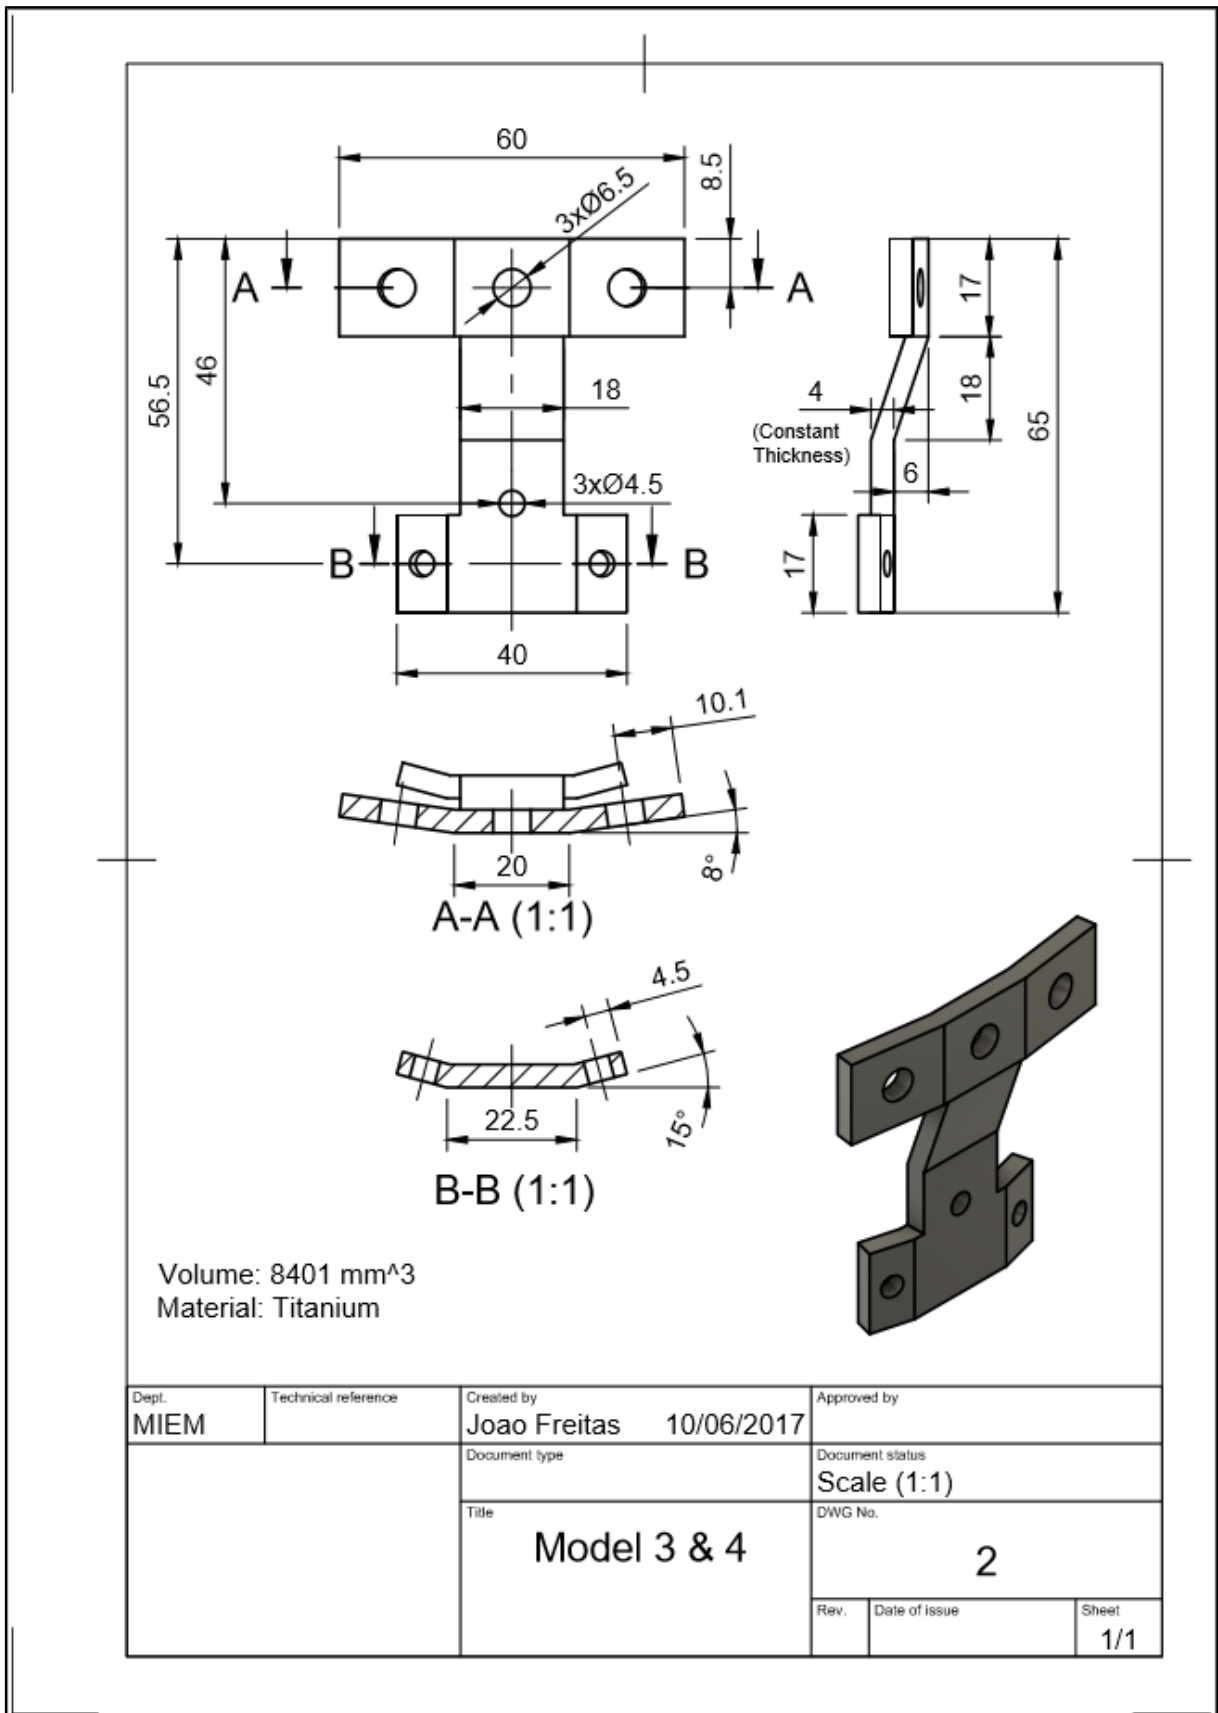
Technical Drawing (Fusion360) of the second plate, used in Model 3 and Model 4.
